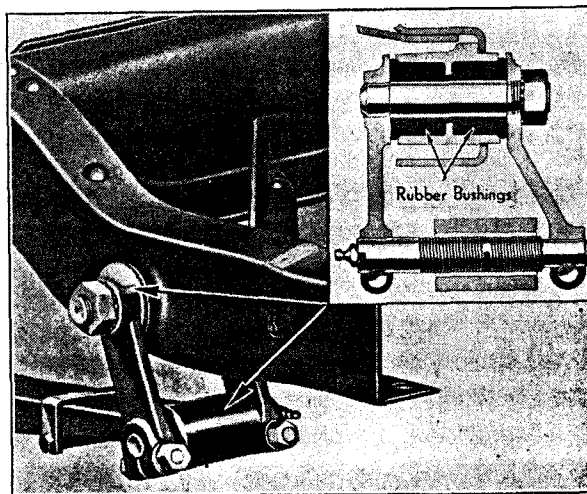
The rear shackles of the rear springs on Cadillac cars have rubber bushings at the upper bolt and a threaded metal bushing at the lower bolt.
